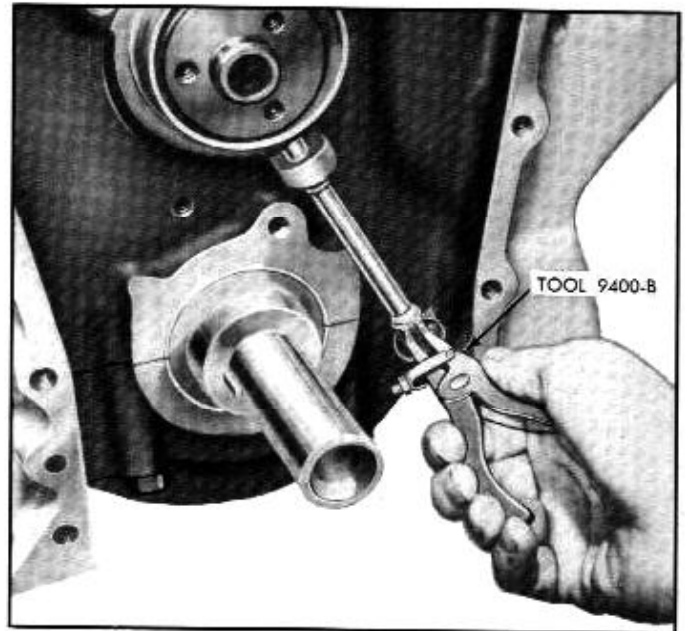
C-48—Installing Fuel Pump Snap Ring Retainer
